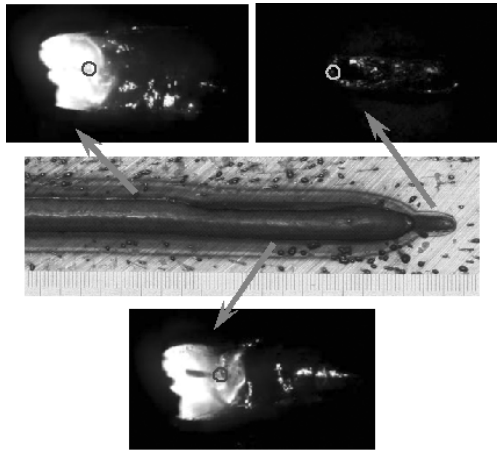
Weld monitoring system in laser-arc hybrid welding
